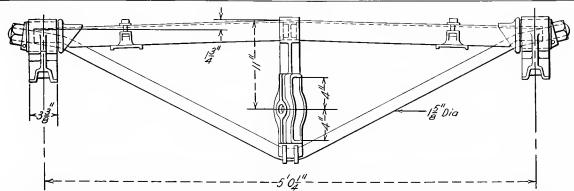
Buffalo Passenger Truss Brake Beam No. 5, with Adjustable Heads. Buffalo Brake Beam Company.
